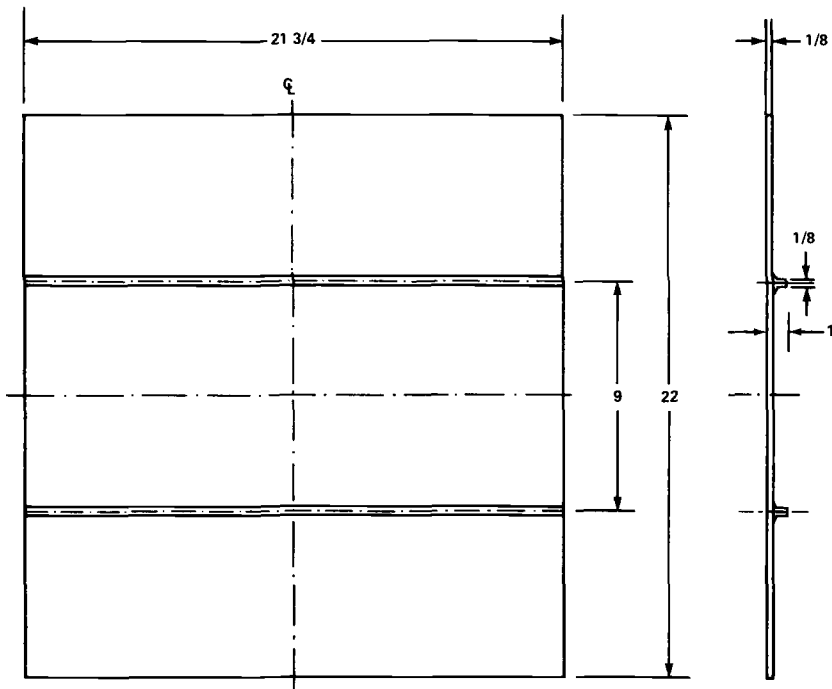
Gas metal arc welded stiffened panel (all dimensions in inches; 1 in. = 25.4 mm).
